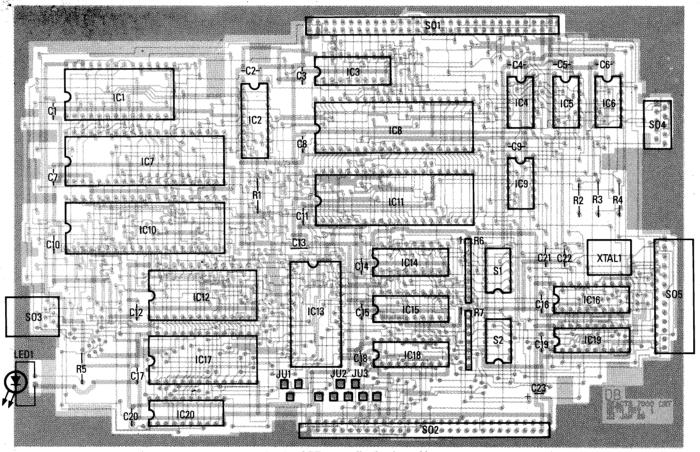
PARTS-PLACEMENT DIAGRAM. The parts for the CRT controller/keyboard interface module are installed on the double-sided board as shown.
